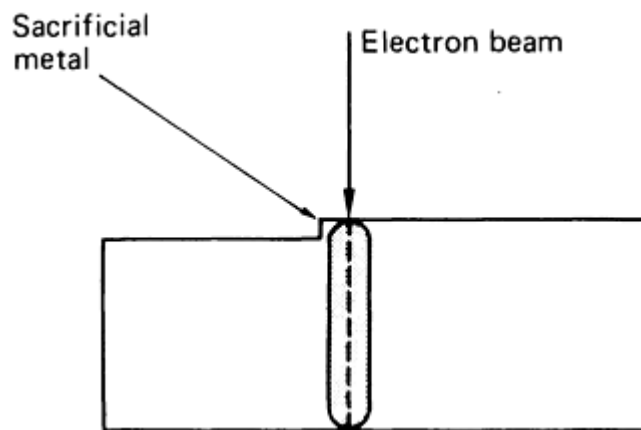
USE OF SACRIFICIAL METAL TO FILL A LARGE GAP IN A SQUARE-GROOVE WELD
